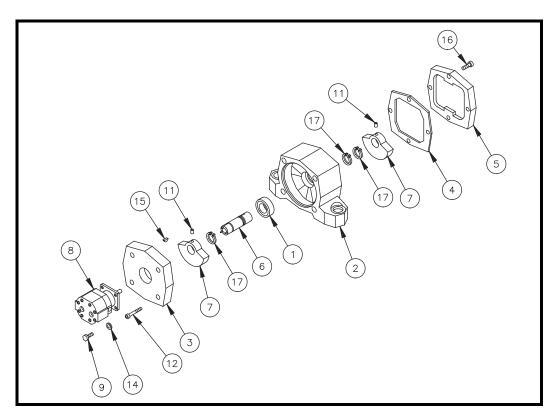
CV2.02-H Assembly, P/N 205692 (sheet 1 of 2)
